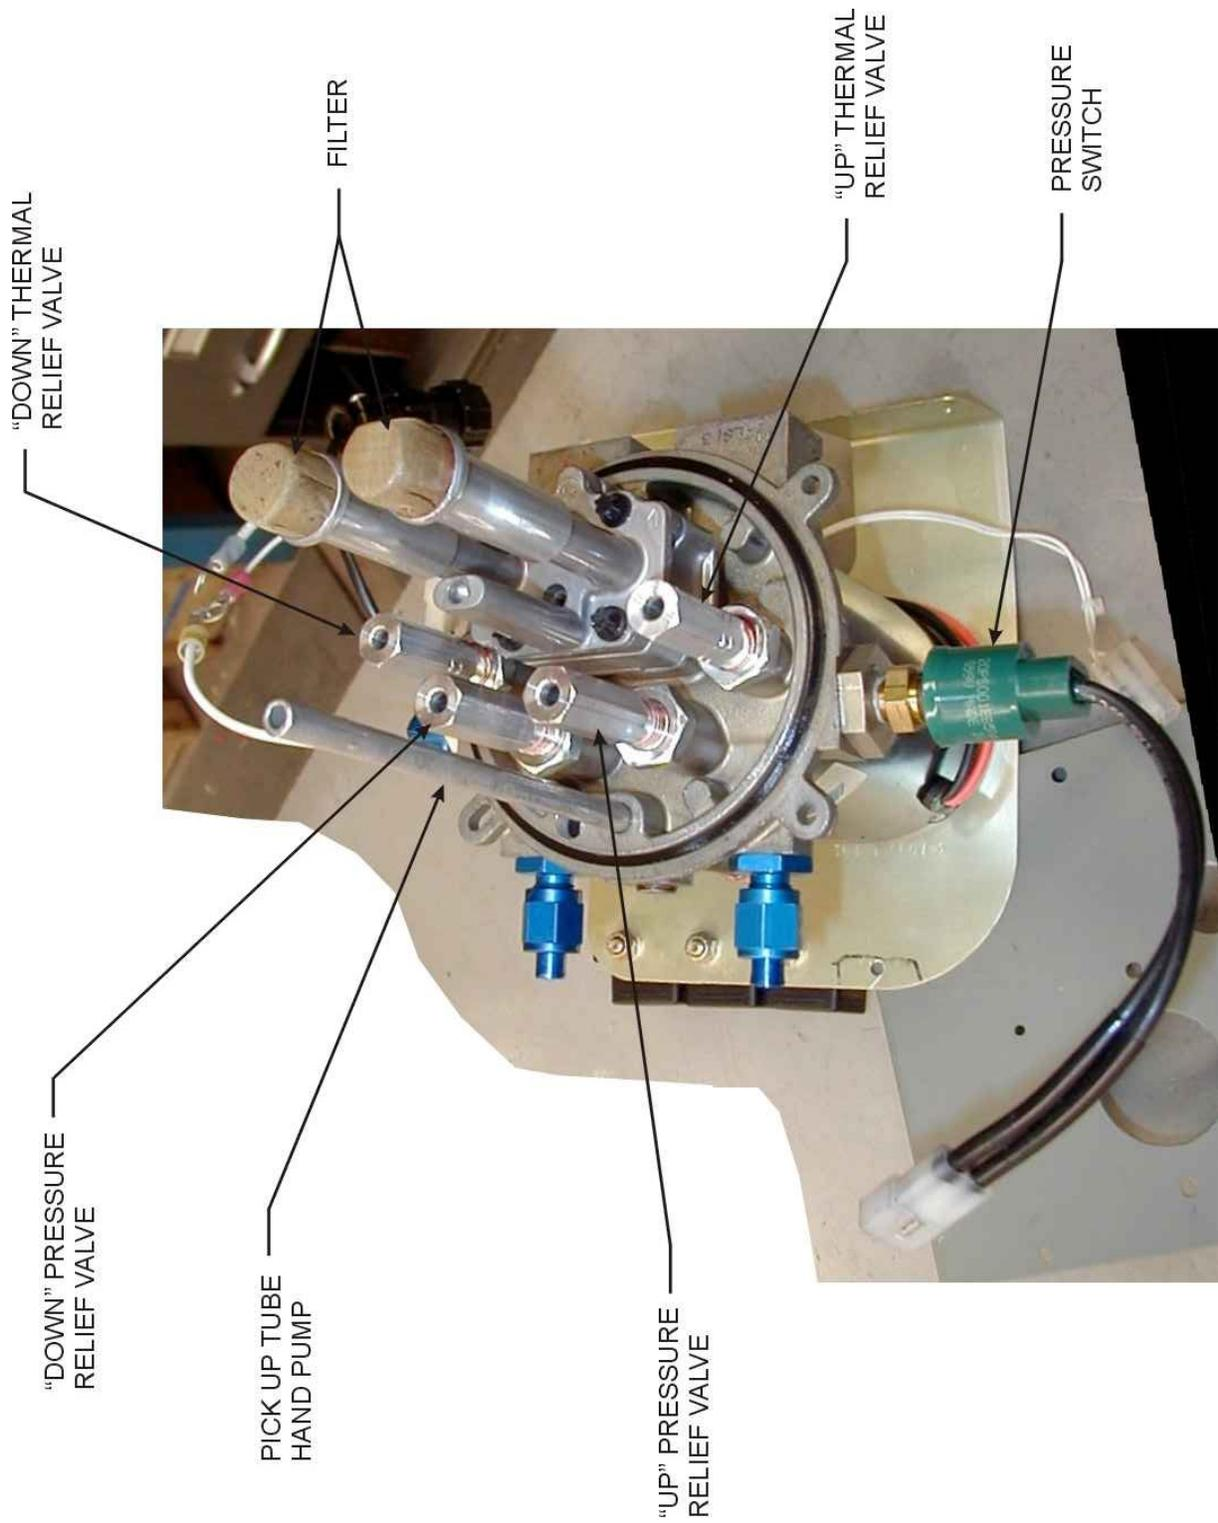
INTERNAL VIEW HYDRAULIC PUMP
